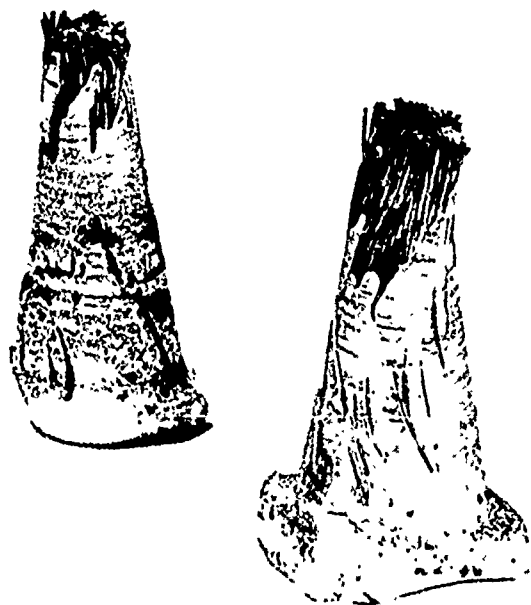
Early congealing of the zinc prevented a complete metal flow throughout the length of socket basket.
